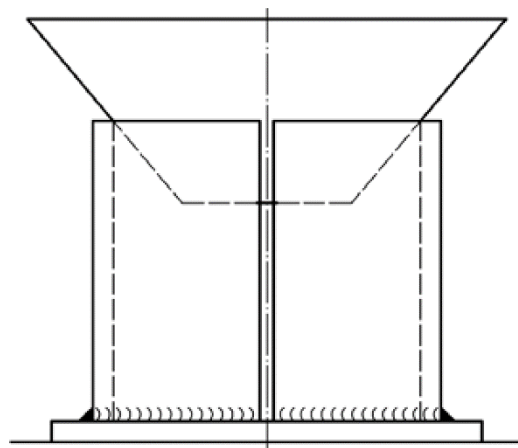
Preparation and fracture testing of test specimens for a fillet weld on pipe
